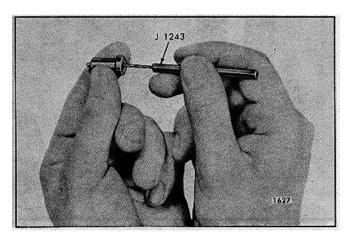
Cleaning Injector Spray Tip using Tool J 1243
